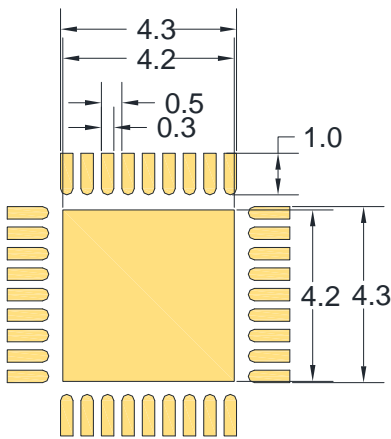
PD70211 Recommended PCB Layout for Thermal Pad Array (mm)
